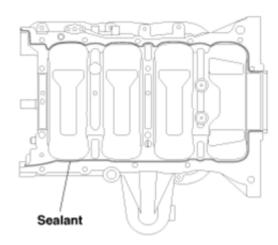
Identifying Sealant Application Area Courtesy of KIA MOTORS AMERICA, INC.
